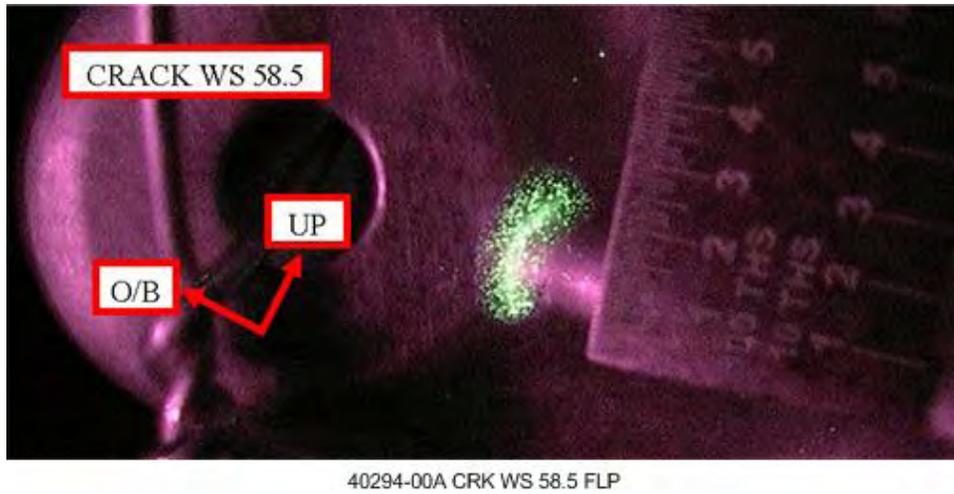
Fluorescent Liquid Penetrant Indication on the Left Wing Main Gear Aft Fitting Assembly WS 58.5
